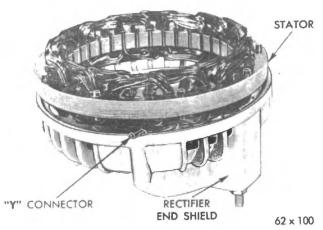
Separating stator and end shield to expose "Y" connector.
